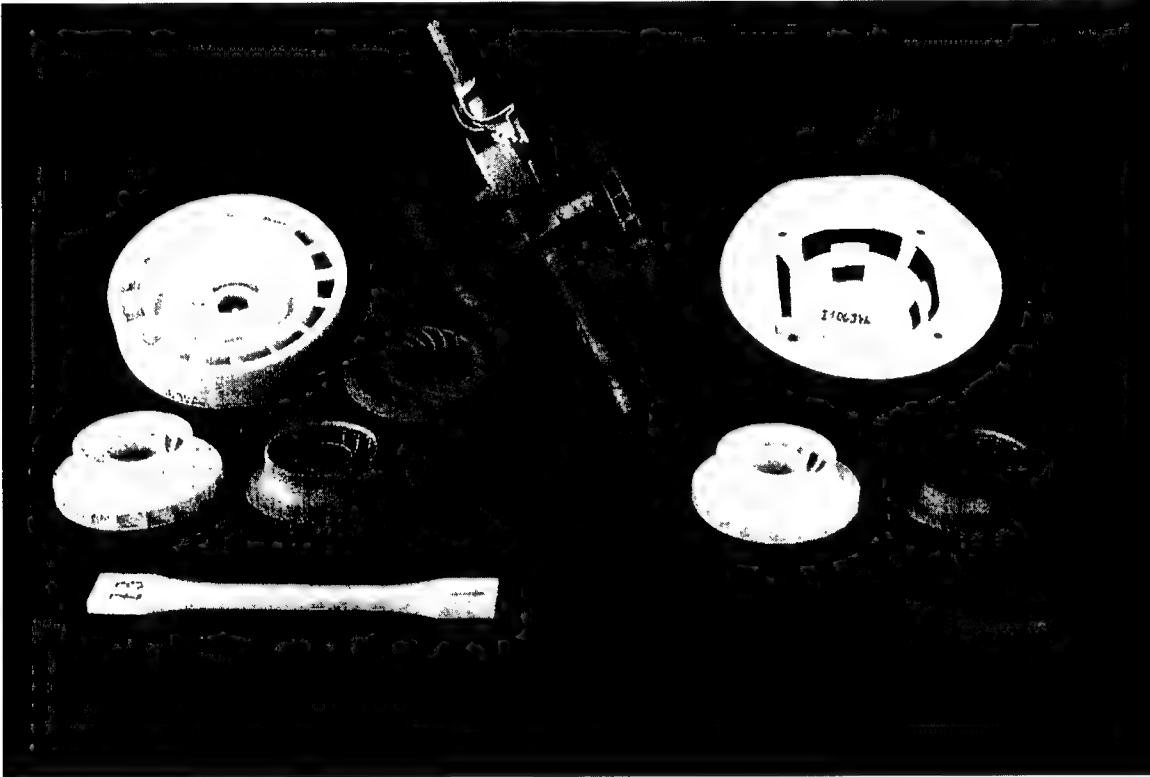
Overview of Polymer parts and corresponding metal parts via investment casting. Bottom: tensile specimen (PS/aluminum); middle: turbine blade housings (left: PA-Copolymer/aluminum, right: PS/aluminum); top: left: turbine (PS); middle: investment casted wax tree (before disassembling); right: loudspeaker housing (PS).
